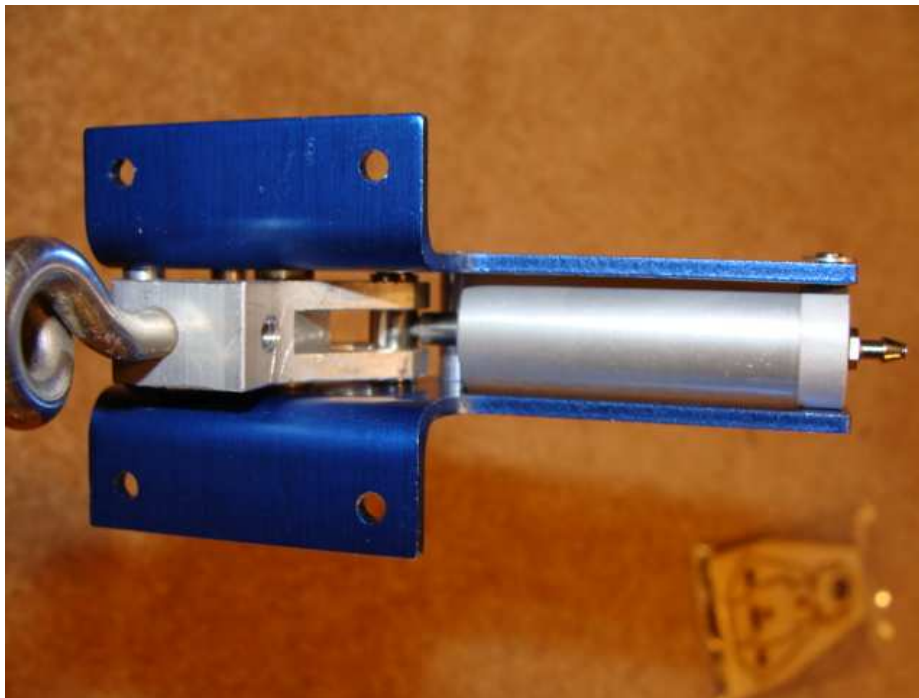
Bottom view of main gear retract. Note airline attach point on right.
